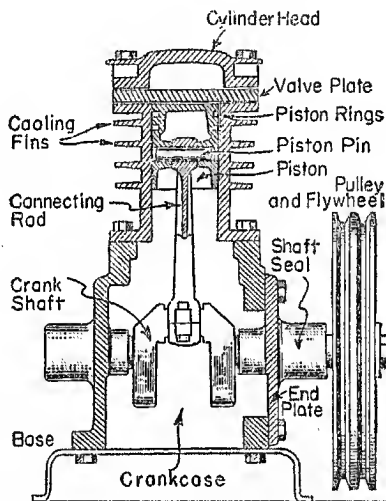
The Parts of a Reciprocating Piston Type of Compressor.
